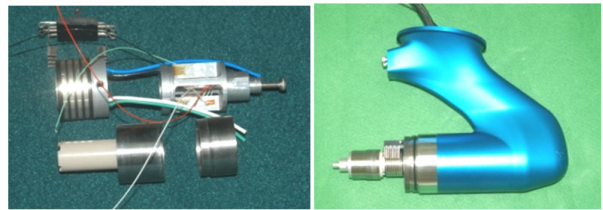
Shapes of sensing assembly measuring torque of a propeller for a motor inside type azimuth thruster
